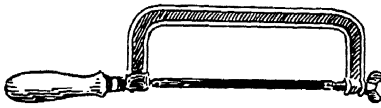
Nonadjustable hack-saw frame with straight wood handle
